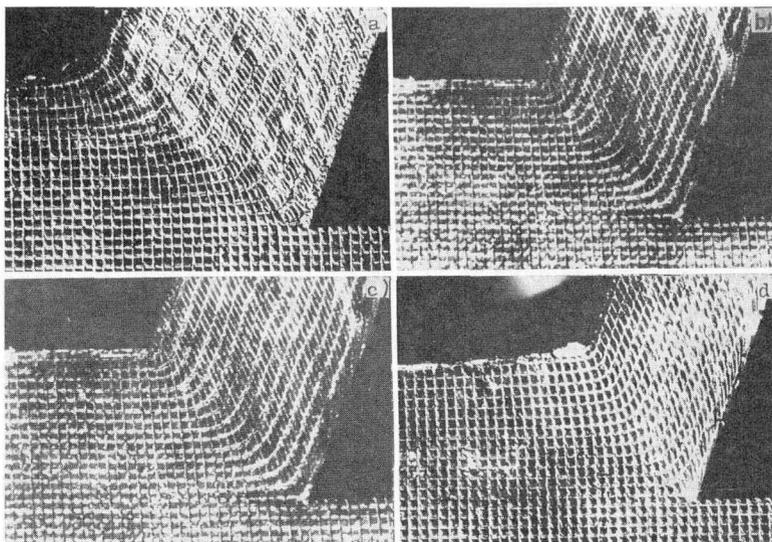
Photographs of partially formed chips in free and controlled shear angle tests.
